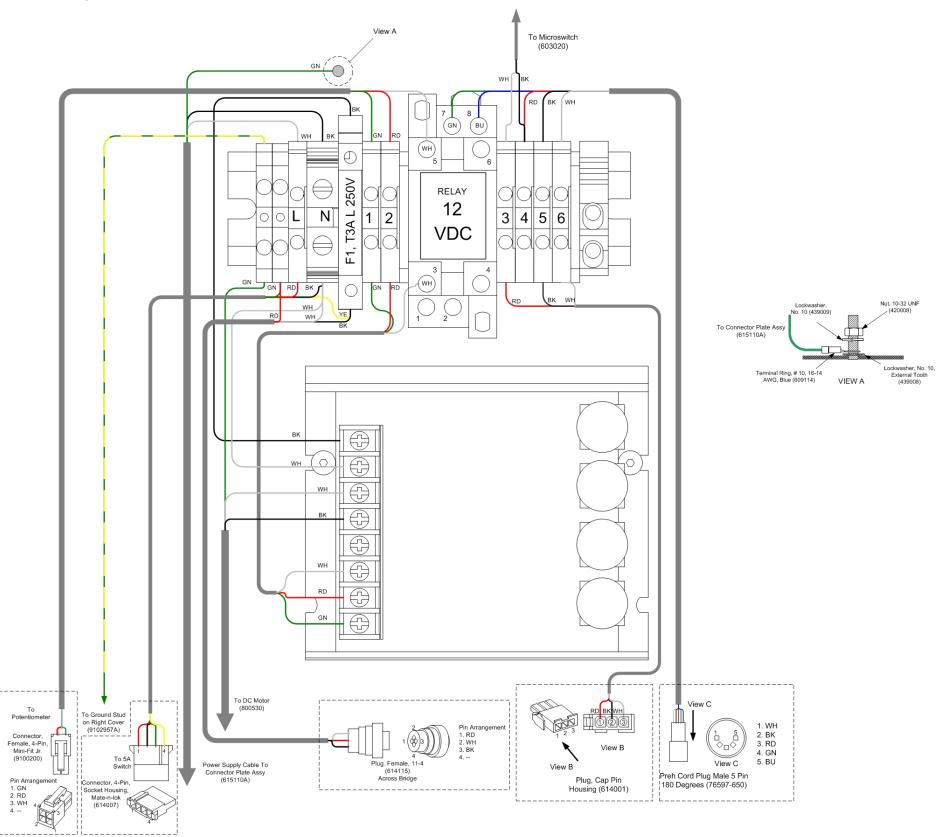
BK800L-3-ELE Left Cover Assembly, (9103011A-ELE)
